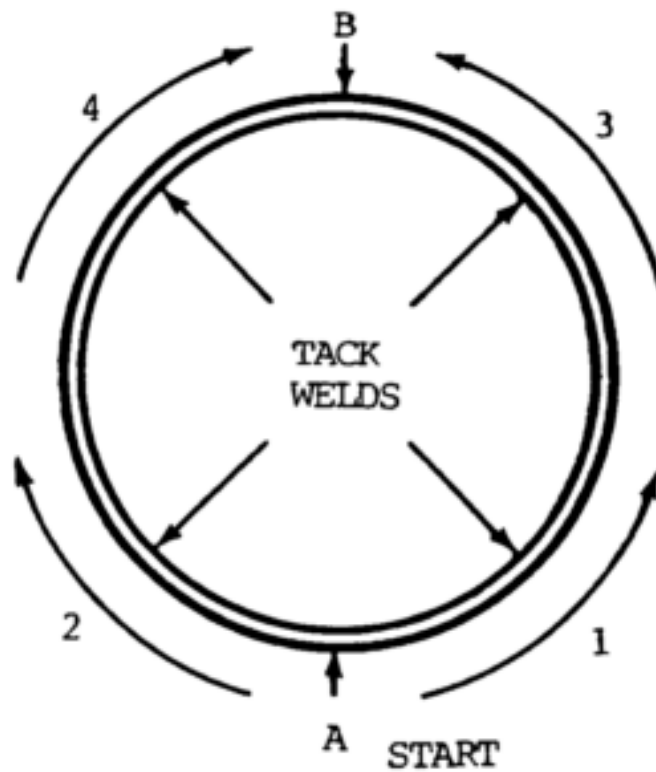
Diagram of horizontal pipe weld with uphand method.
